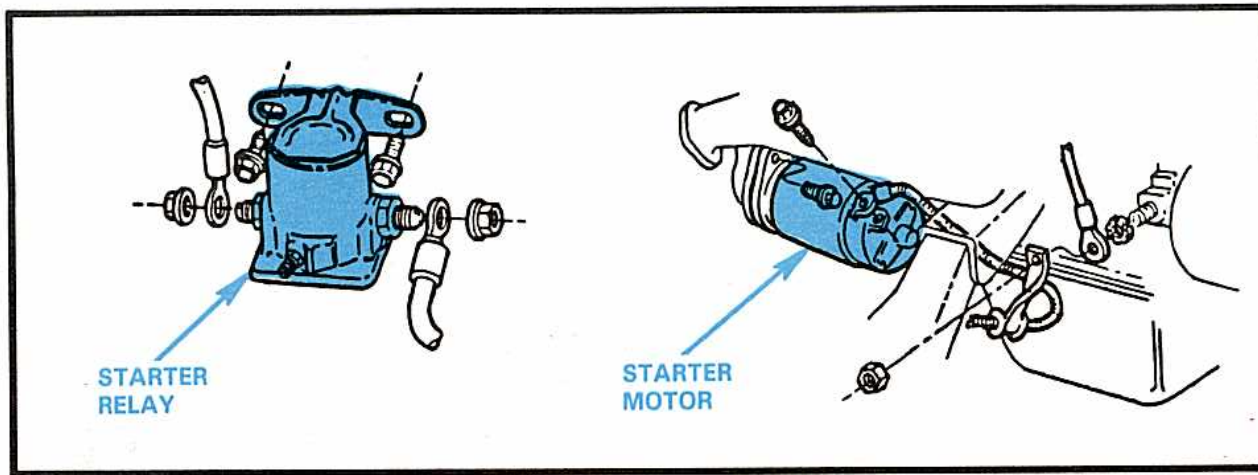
Starter Wiring — 3.8L and 5.0L Engines
